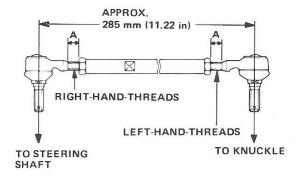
Tie-rod installation details (note the length dimensions and thread type indicated) (Sec 11)
